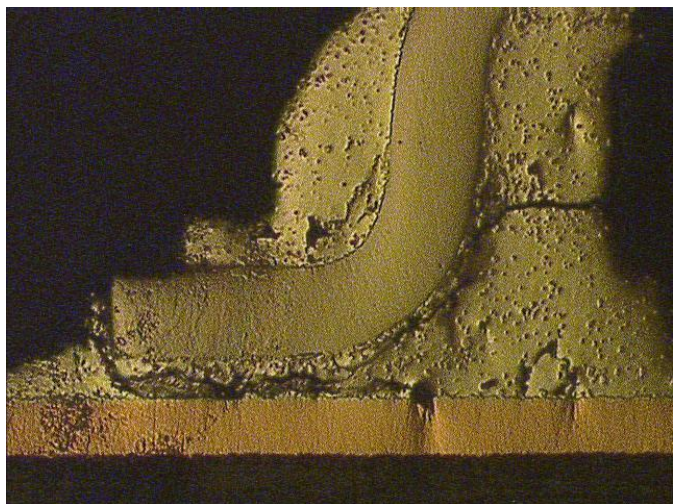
TSOP-50 Solder Joints, Board 102, Component U34, SN100C/SnBi, Failed @ 1985 Cycles
